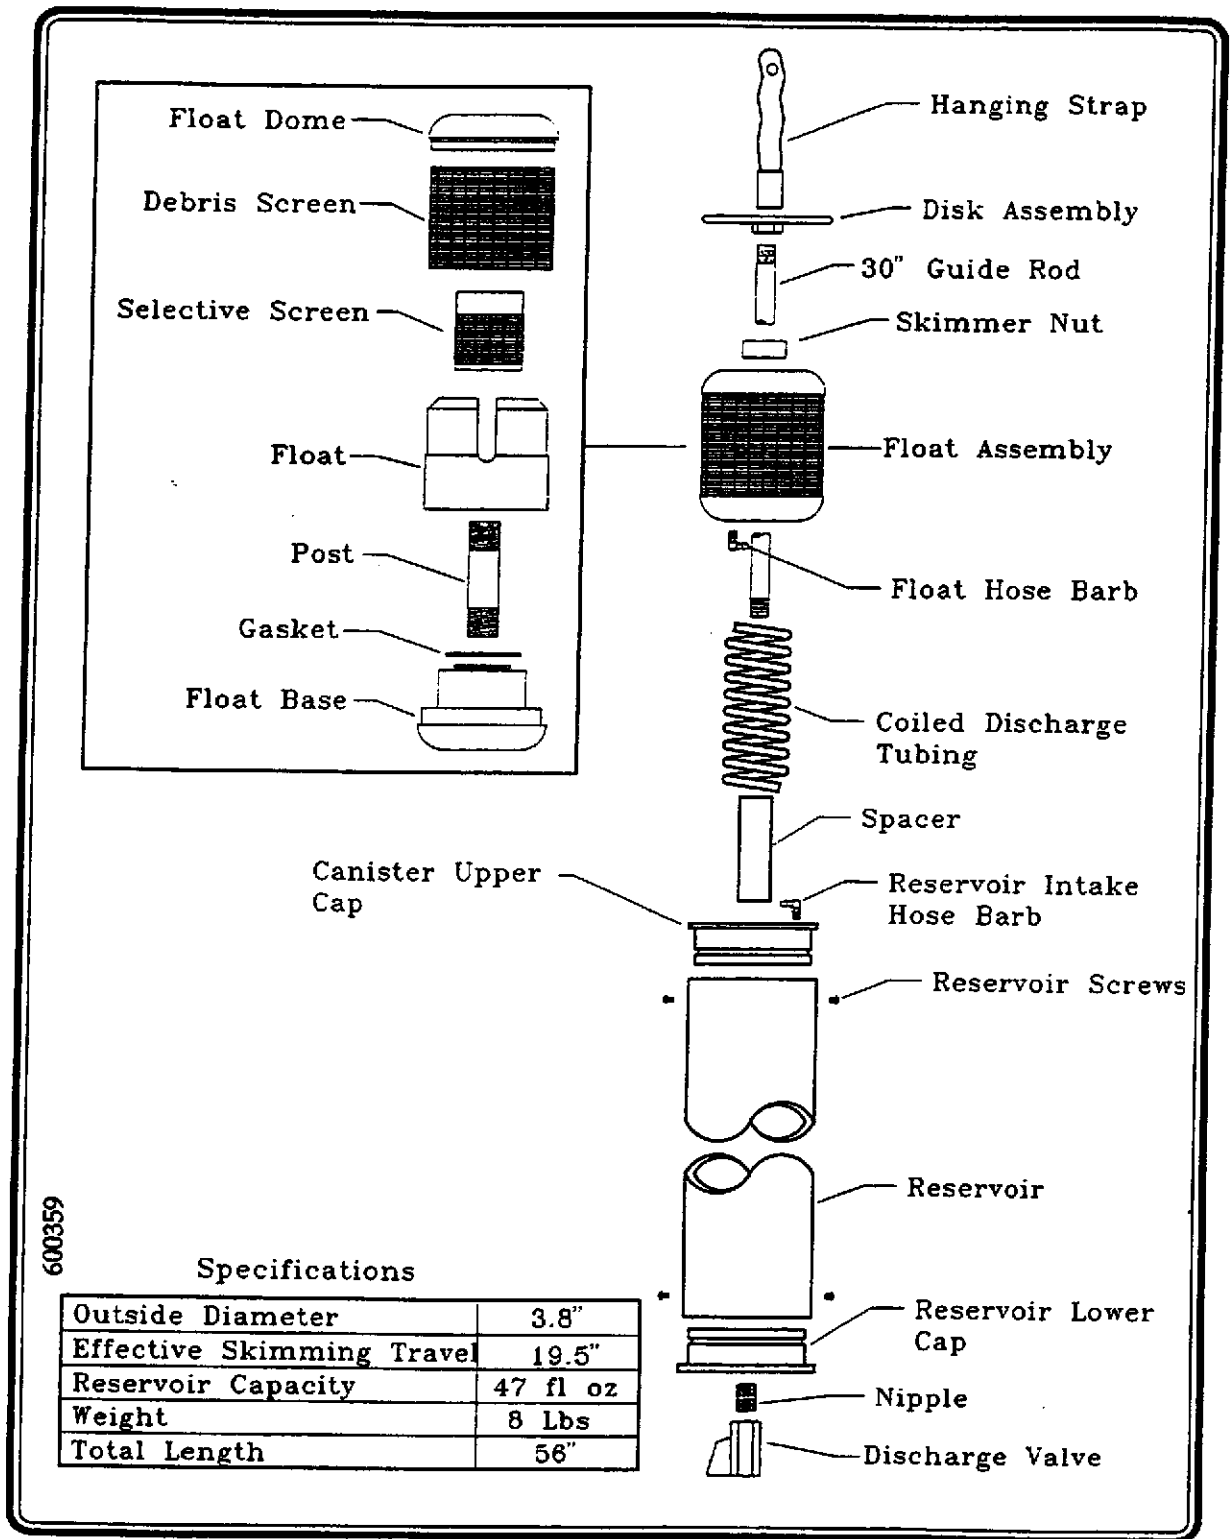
Four-Inch Passive Selective Oil Skimmer (SOS-4)
